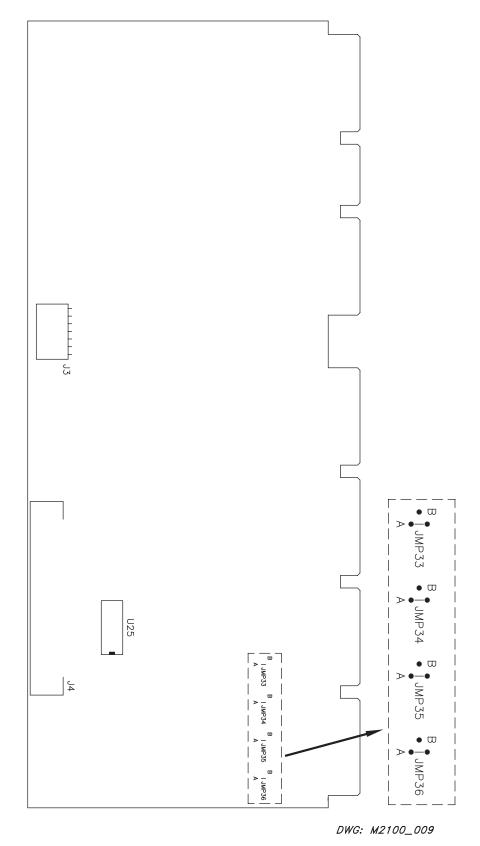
SEL-2100 Optional I/O Board Jumper Location
